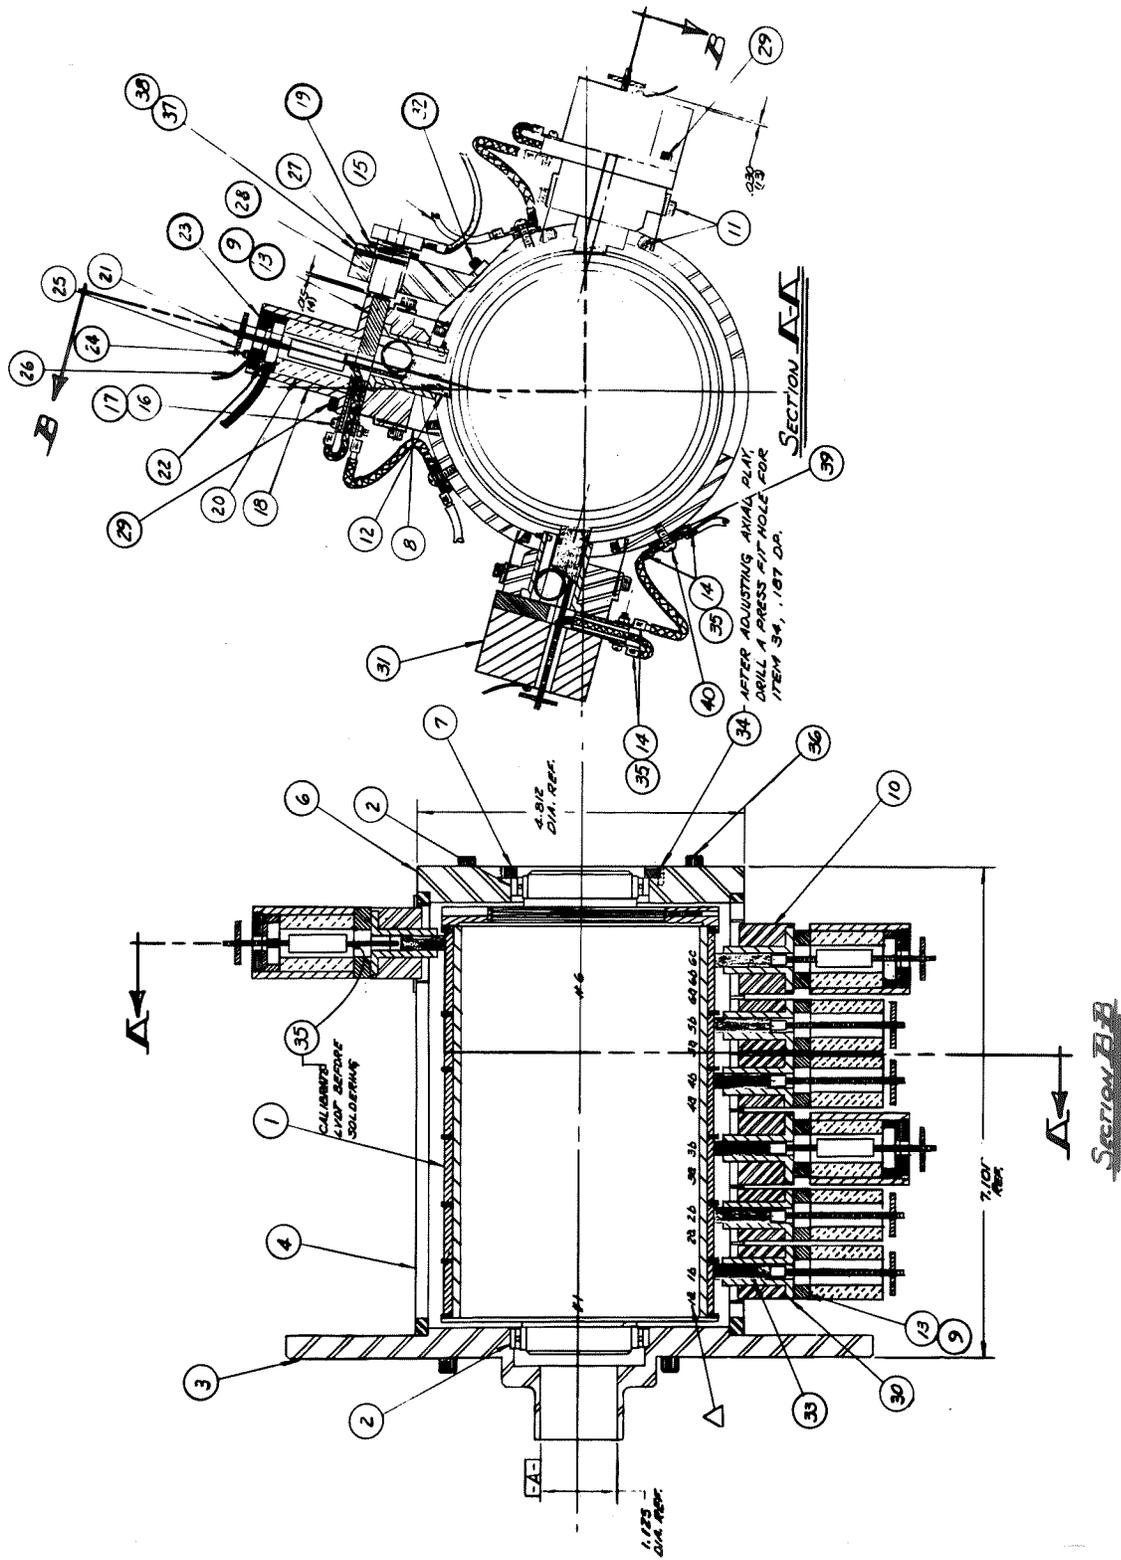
CAPSULE ASSEMBLY DRAWING SHOWING TRANSDUCER MOUNTING
